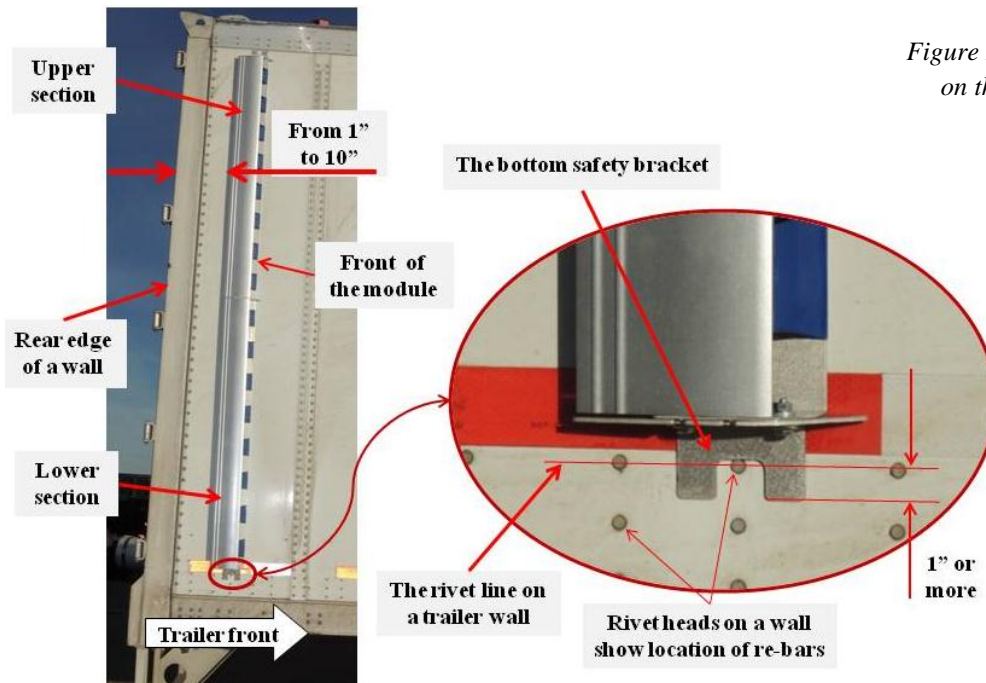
Positioning the wall module on the passenger-side trailer wall
